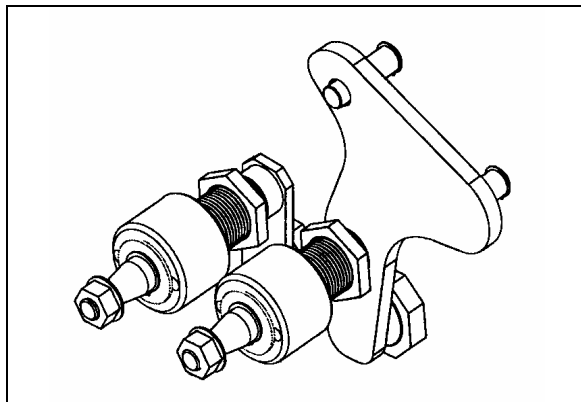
DRIVING MECHANISM (MOTOR SIDE) 23254
